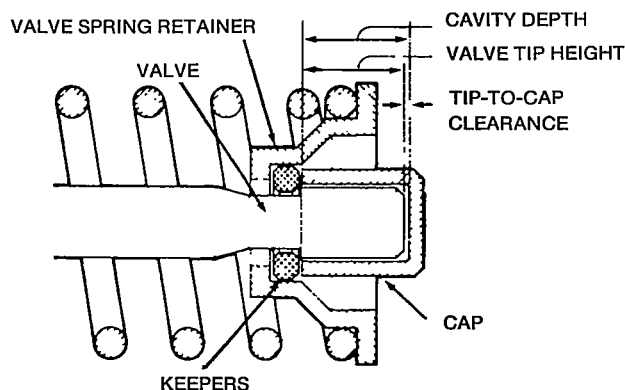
MEASURING VALVE TIP-TO-CAP CLEARANCE
